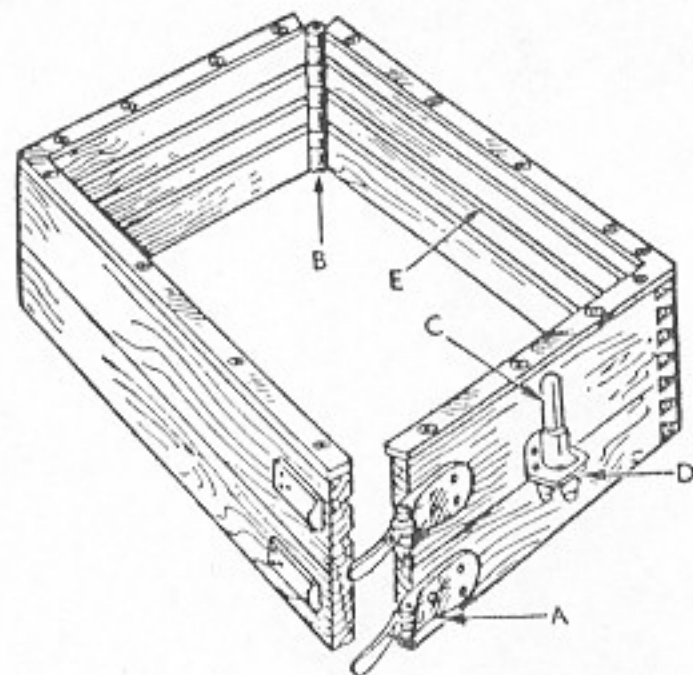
By using a snap-flask such as that shown, left, considerable saving in flasks may be effected. When the mold is completed the flask is opened and the mold removed. The main parts shown are: A, locking device; B, hinges; C, pins to hold parts in register; D, slide to take pins; E, grooves to retain sand in flask.
